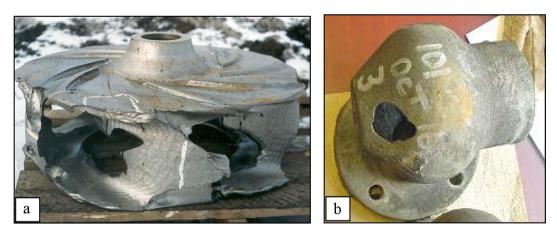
Examples of slurry erosion in a) a pump impeller and b) nozzle.
